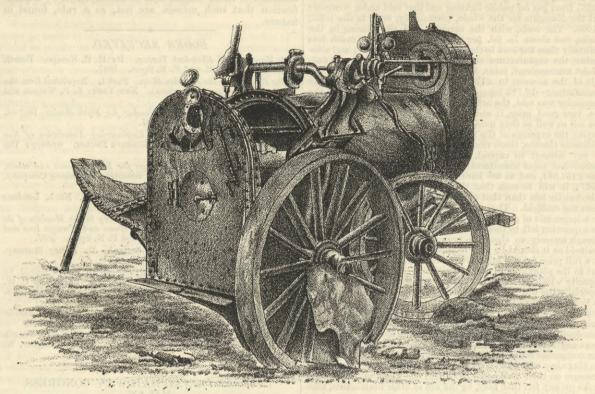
Fig. I.-RIGHT SIDE VIEW OF THE ENGINE AFTER THE EXPLOSION.
